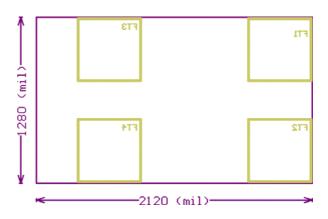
NCV7420EVB PCB Bottom Assembly Drawing
